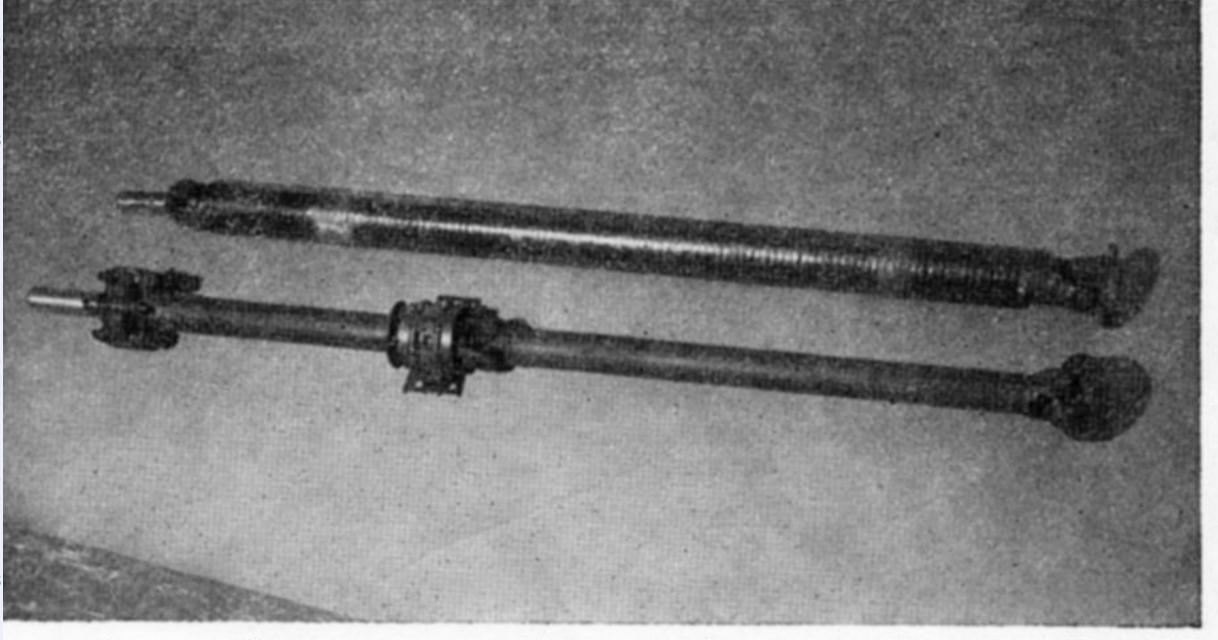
Composite drive shaft (upper) with corresponding steel shaft.
